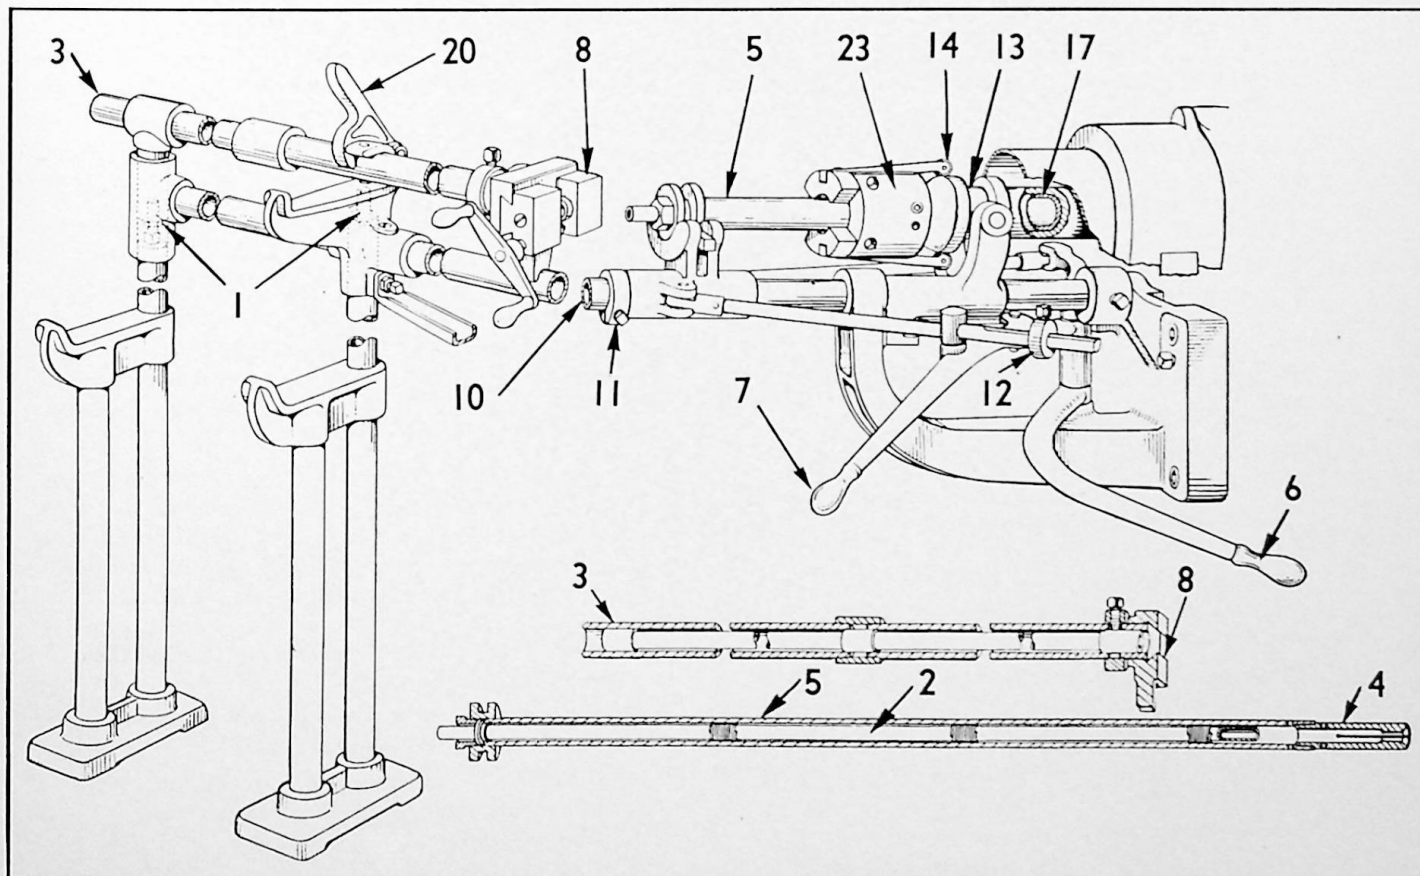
Finger Bar Feed (No. 1 Electric Turret Lathe).
